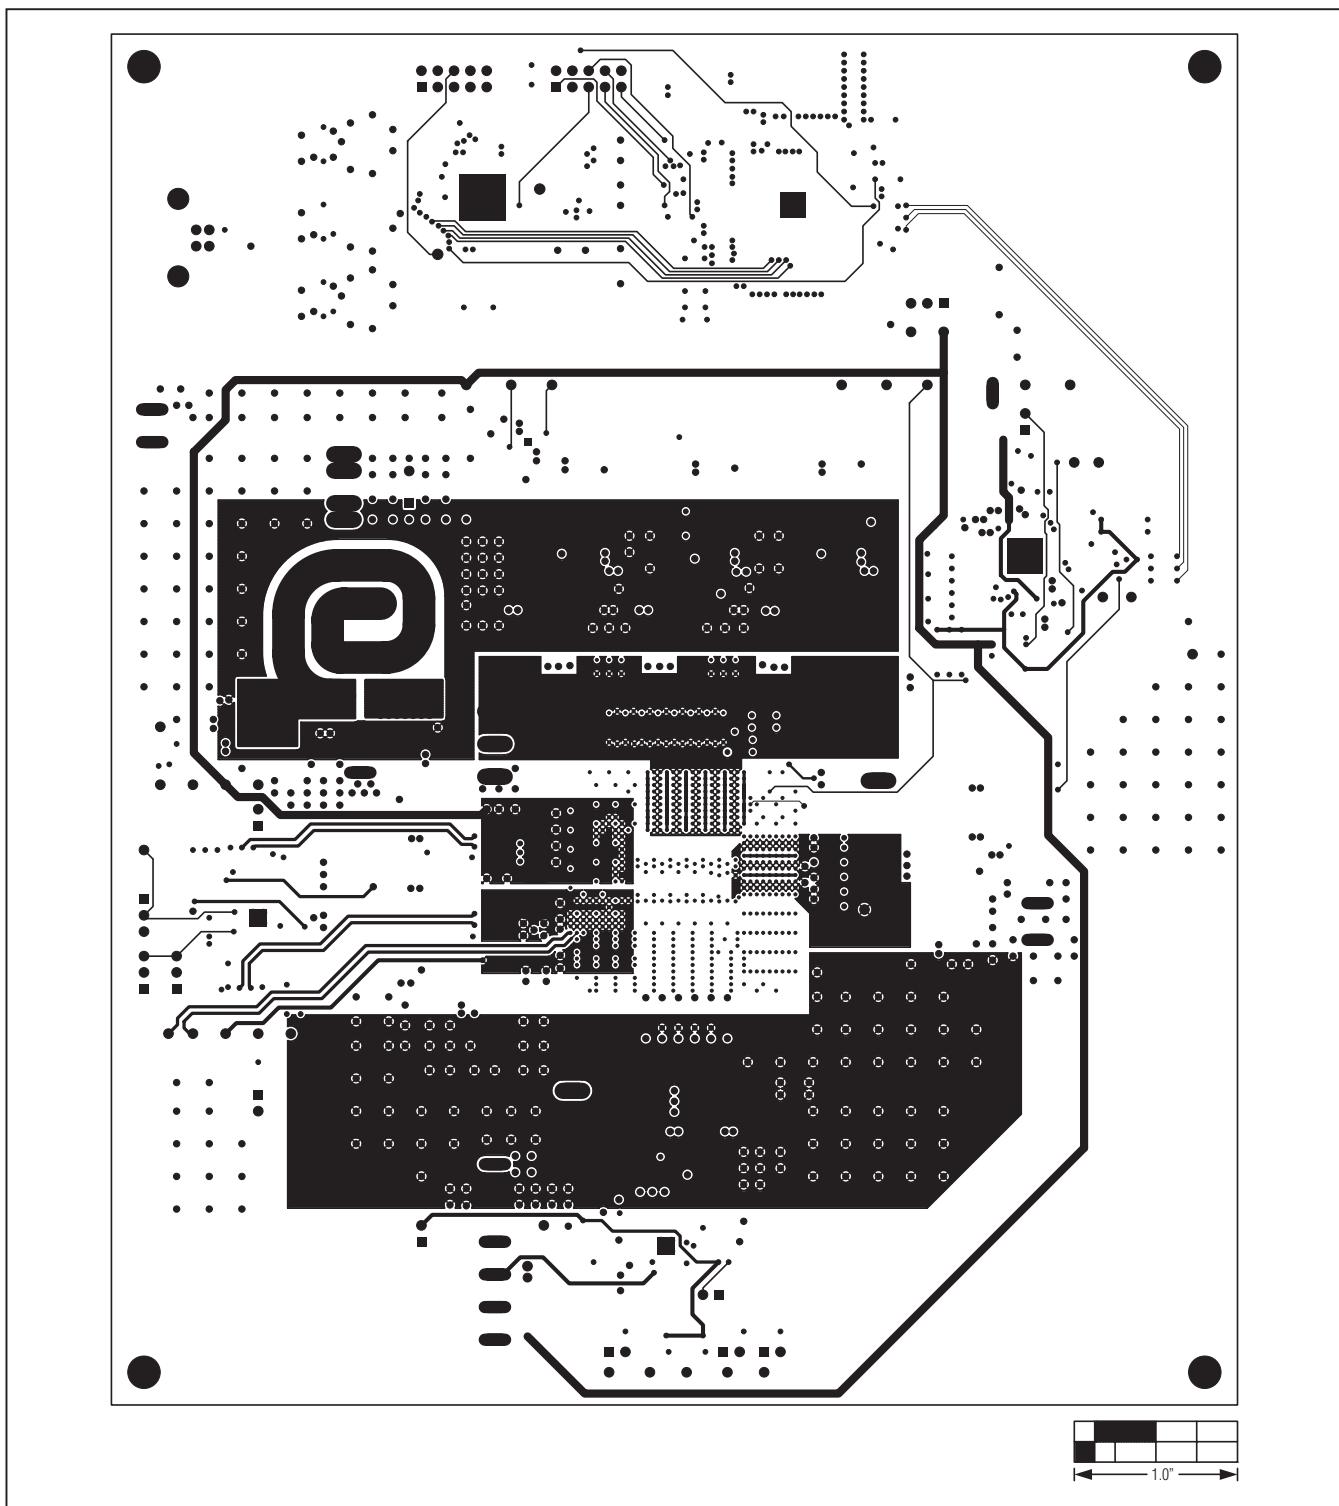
MAX17039 EV Kit PCB Layout—Internal Layer 3 (Signal Layer)
